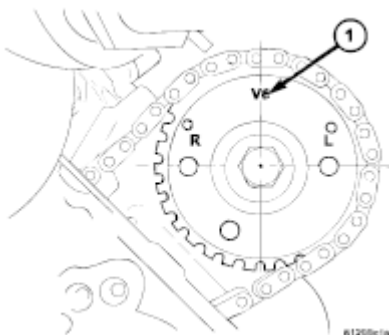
Identifying V6 Mark On Camshaft Sprocket
